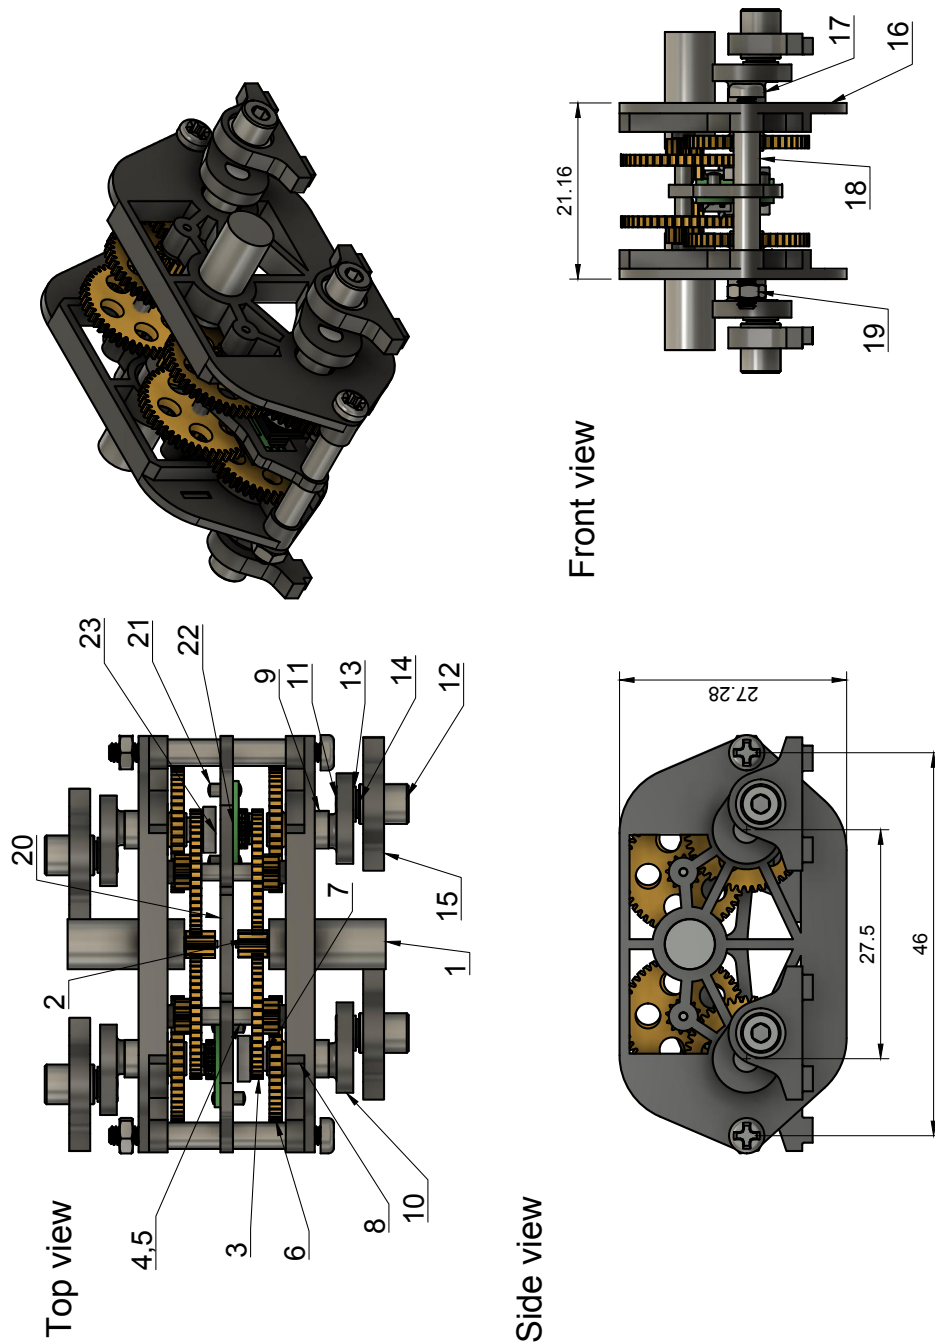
Engineering drawing of the LoadRoACH transmission module with annotations of components from the bill of materials. Dimension units are millimeters.
